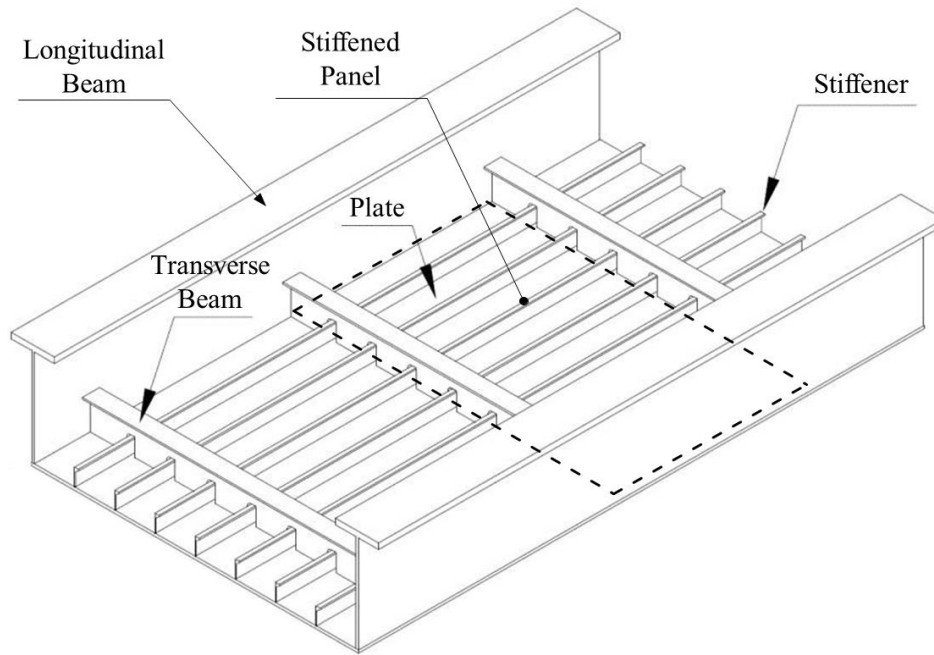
Typical structural arrangement of a ship's hull bottom. (Source: [38])
